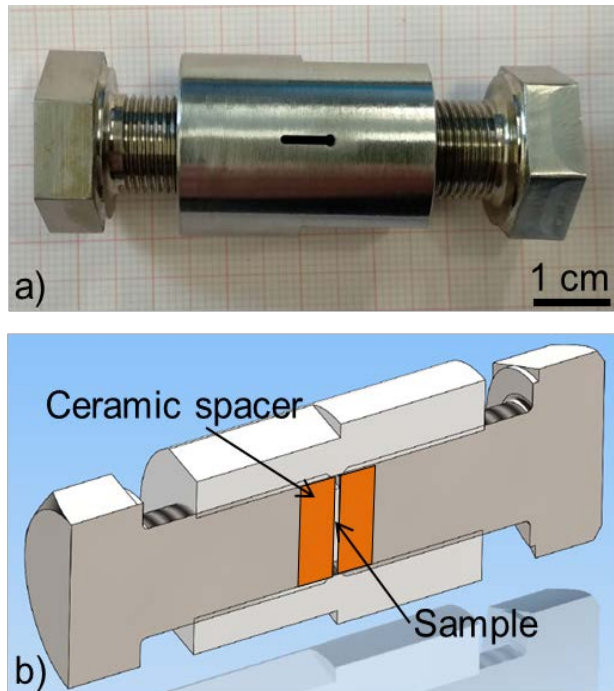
(a) Pressure assembly, (b) cross-section schematic of the pressure assembly.
